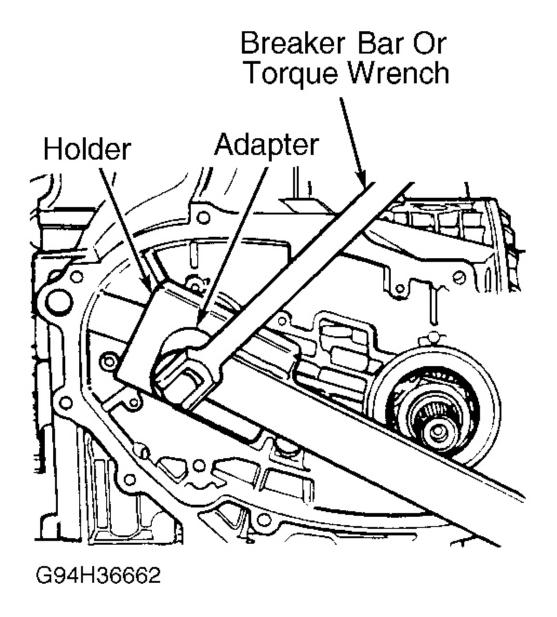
Compressing 2-4 Clutch Piston Retainer Courtesy of CHRYSLER LLC
